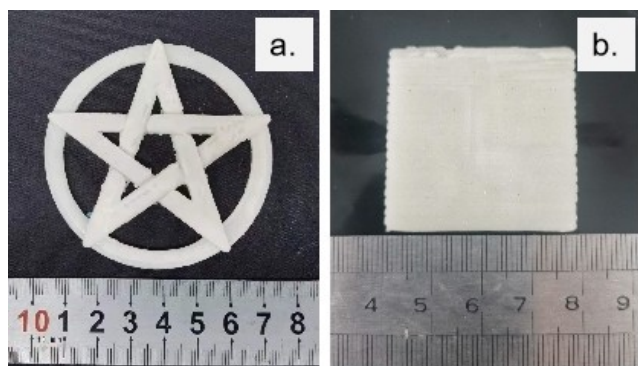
Photographs of printed complex sample (a) and sheet sample (b).
